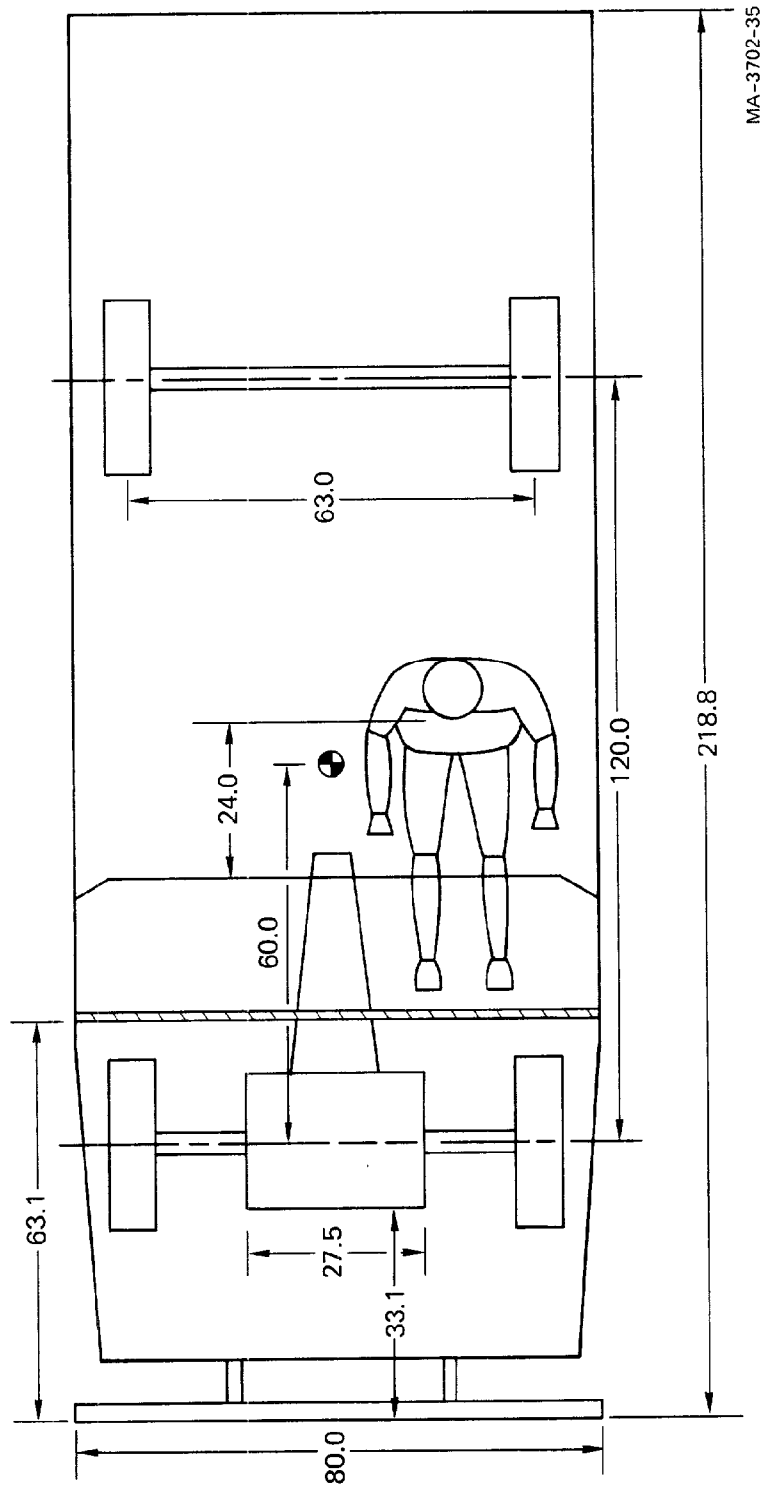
LAYOUT DRAWING OF FULL SIZE CAR
